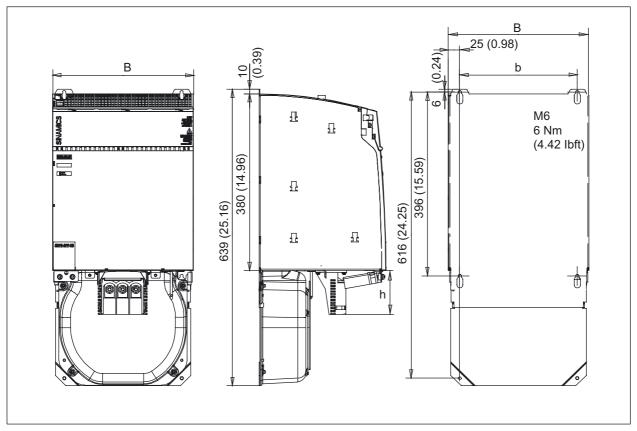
Dimension drawing of Active Line Modules with internal air cooling (80 kW and 120 kW)
